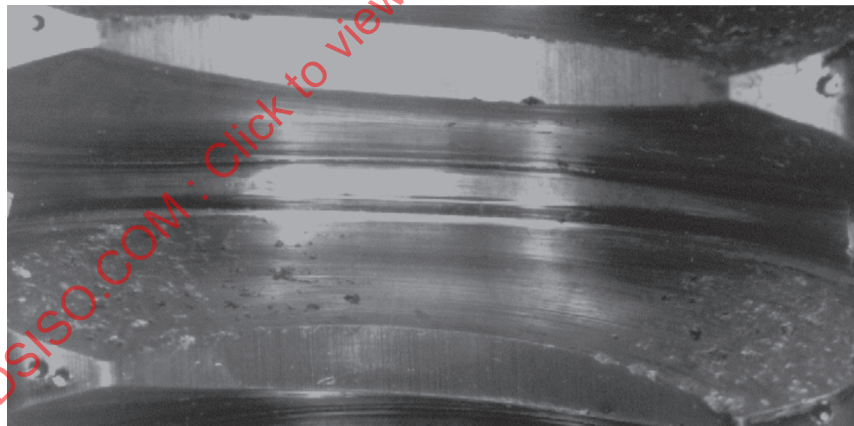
Macropitting in progress for a low lead angle worm gear set
